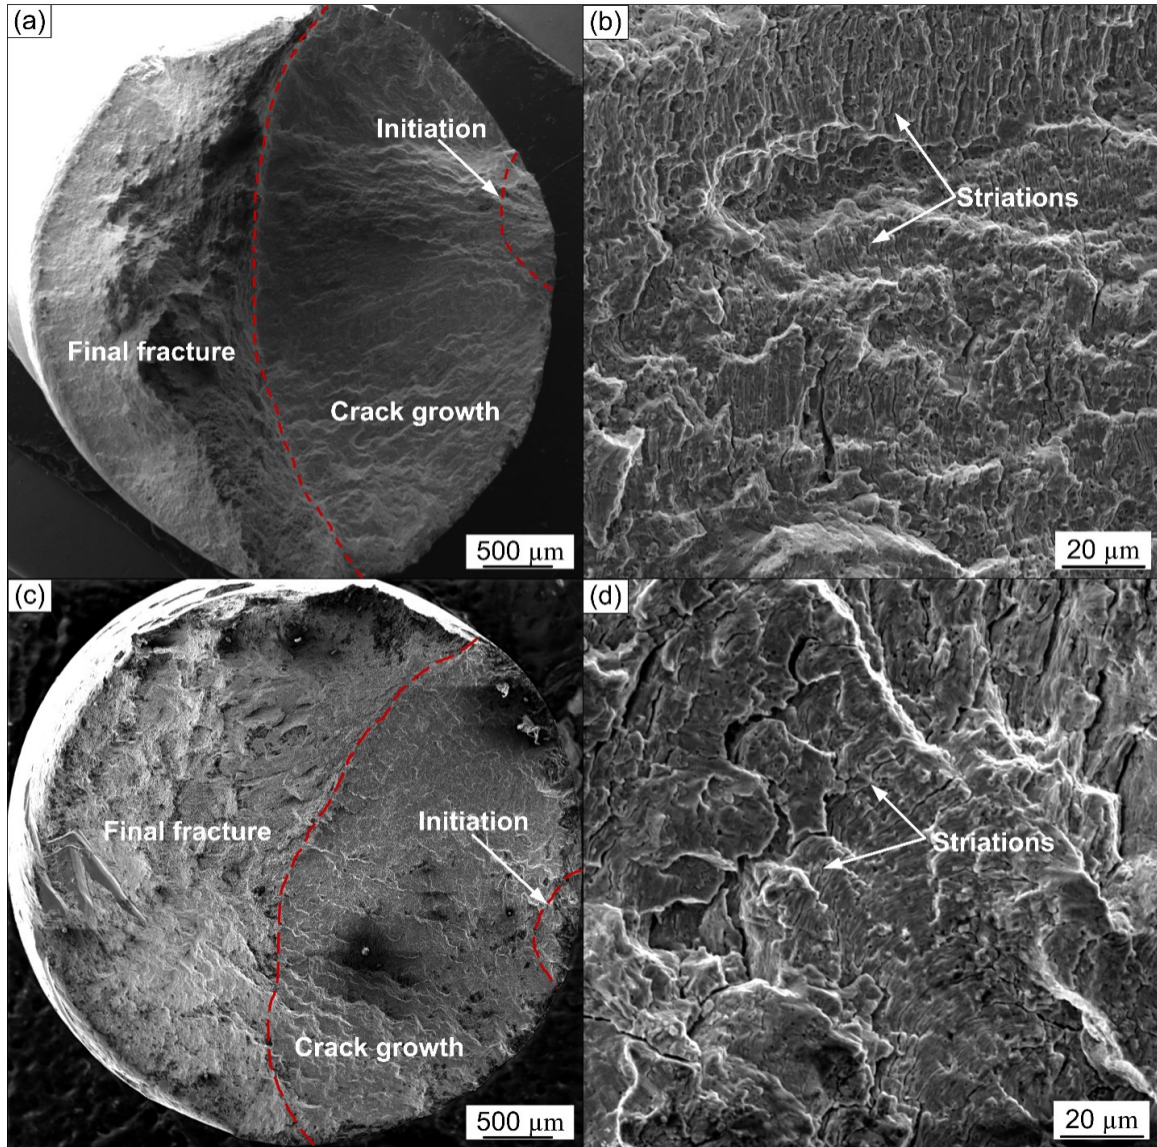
Fractography of defect-free specimens: (a) the entire fracture surface Specimen C (b) fatigue striations in Specimen C, (c) the entire fracture surface Specimen D, and (d) fatigue striations in Specimen D
